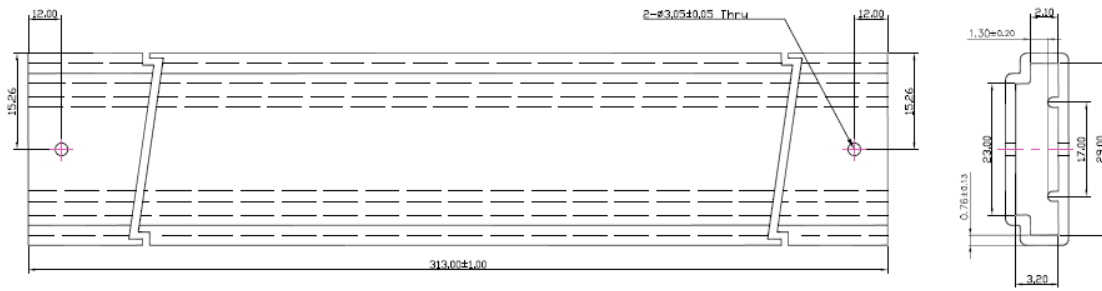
Tube dimensions for L2C5-xxxx1211X19Bx.
